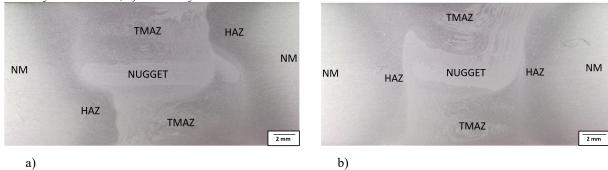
Macrostructures of FSW welded joints: a) by cylindrical tool, b) by conical tool
